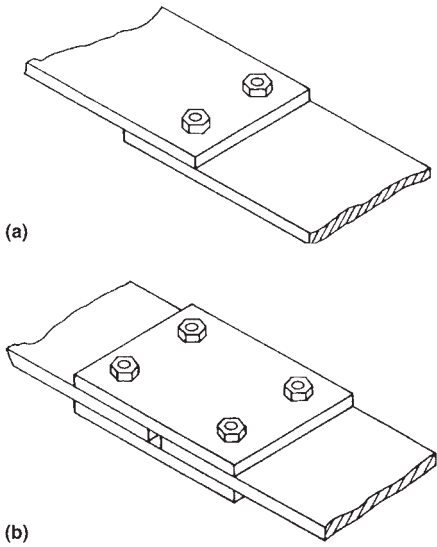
Illustrations of two mechanical fastener, shear-loaded joints. (a) Lap joint. (b) Butt-type (or double-lap) joint. Source: Messler 1993b
